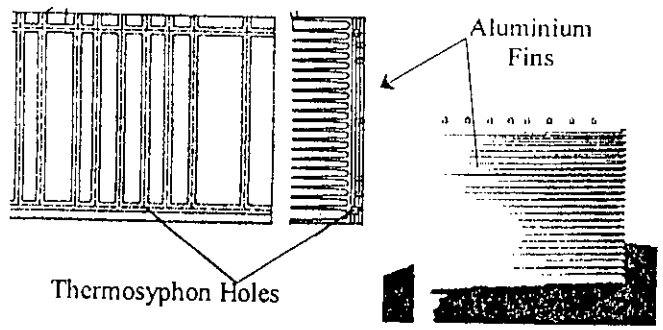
Vapour Chamber Thermosyphon used as a heat spreader [2]
